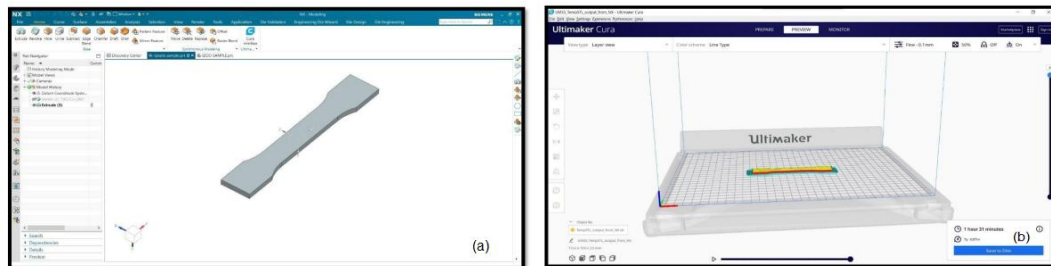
(a) CAD modelling and (b) Slicing of the component
